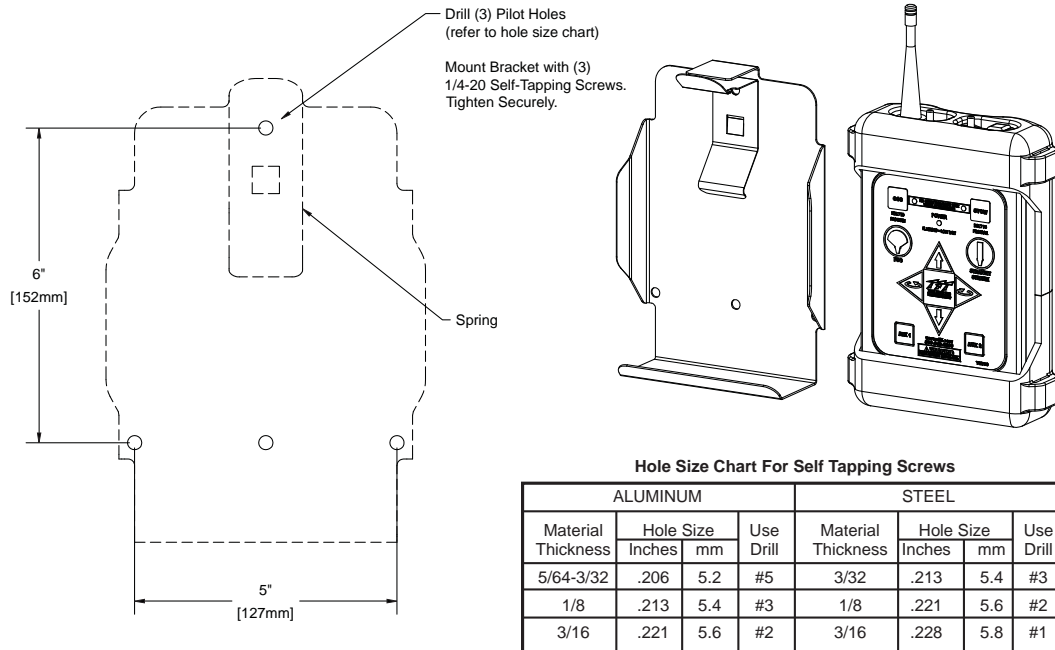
Wireless Operator Station Storage Bracket Hole Dimensions
